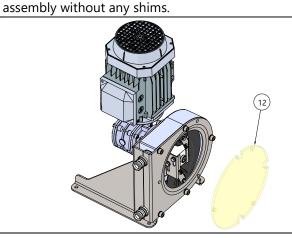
Assemble the front connection bracket and the front cover [12].
